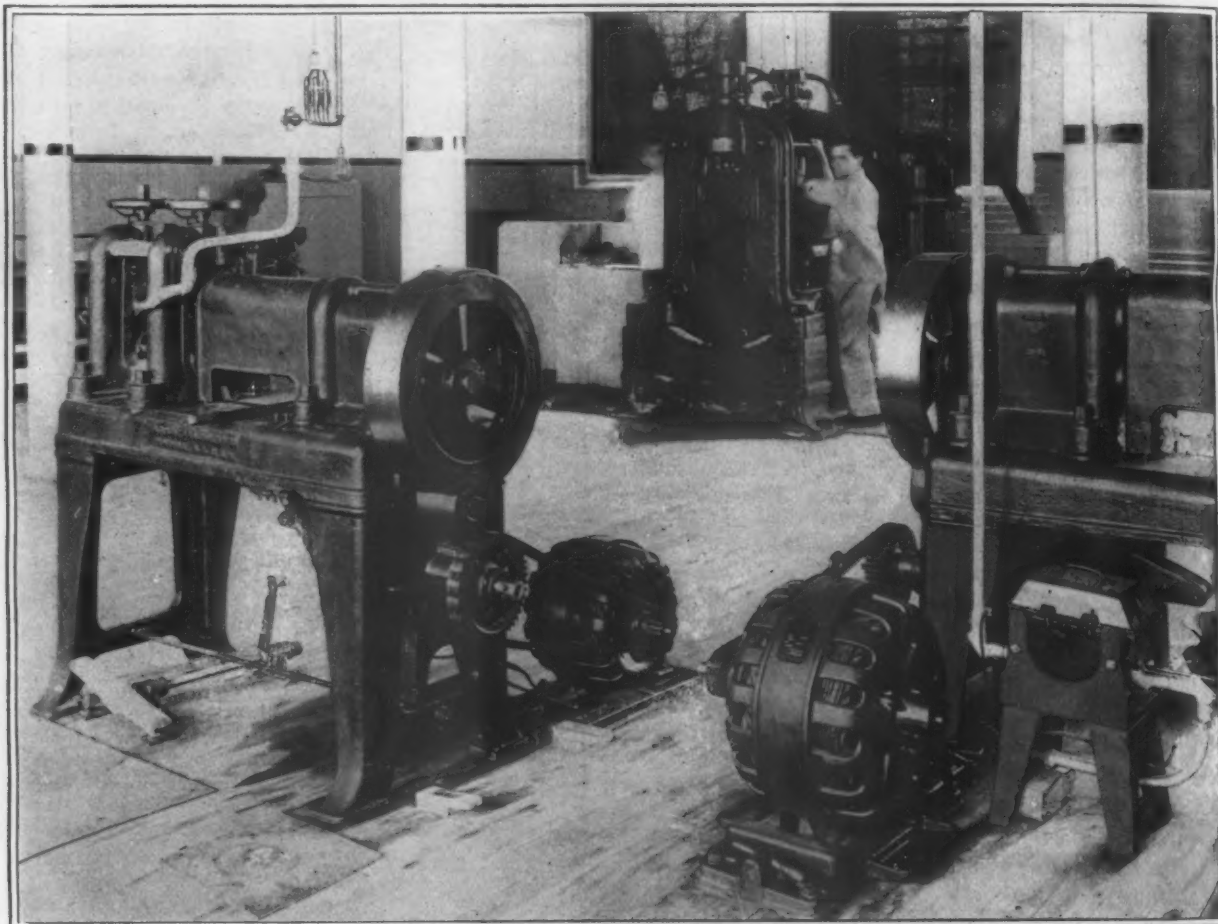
Motor Drive in the Improved Seamless Wire Company's Plant, Providence, R. I. Motors Driving Reducing Rolls Through Chains and Controlled by Auto-Starters Operated by Foot Treadles.
